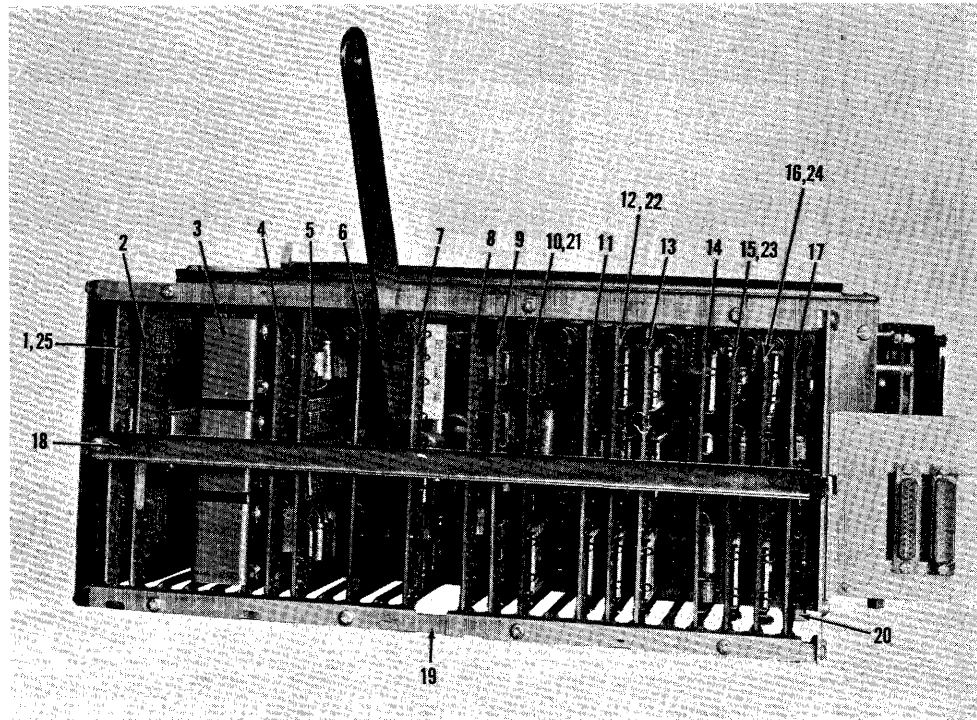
Bustle Assembly for TerminiNet 300 Printer
